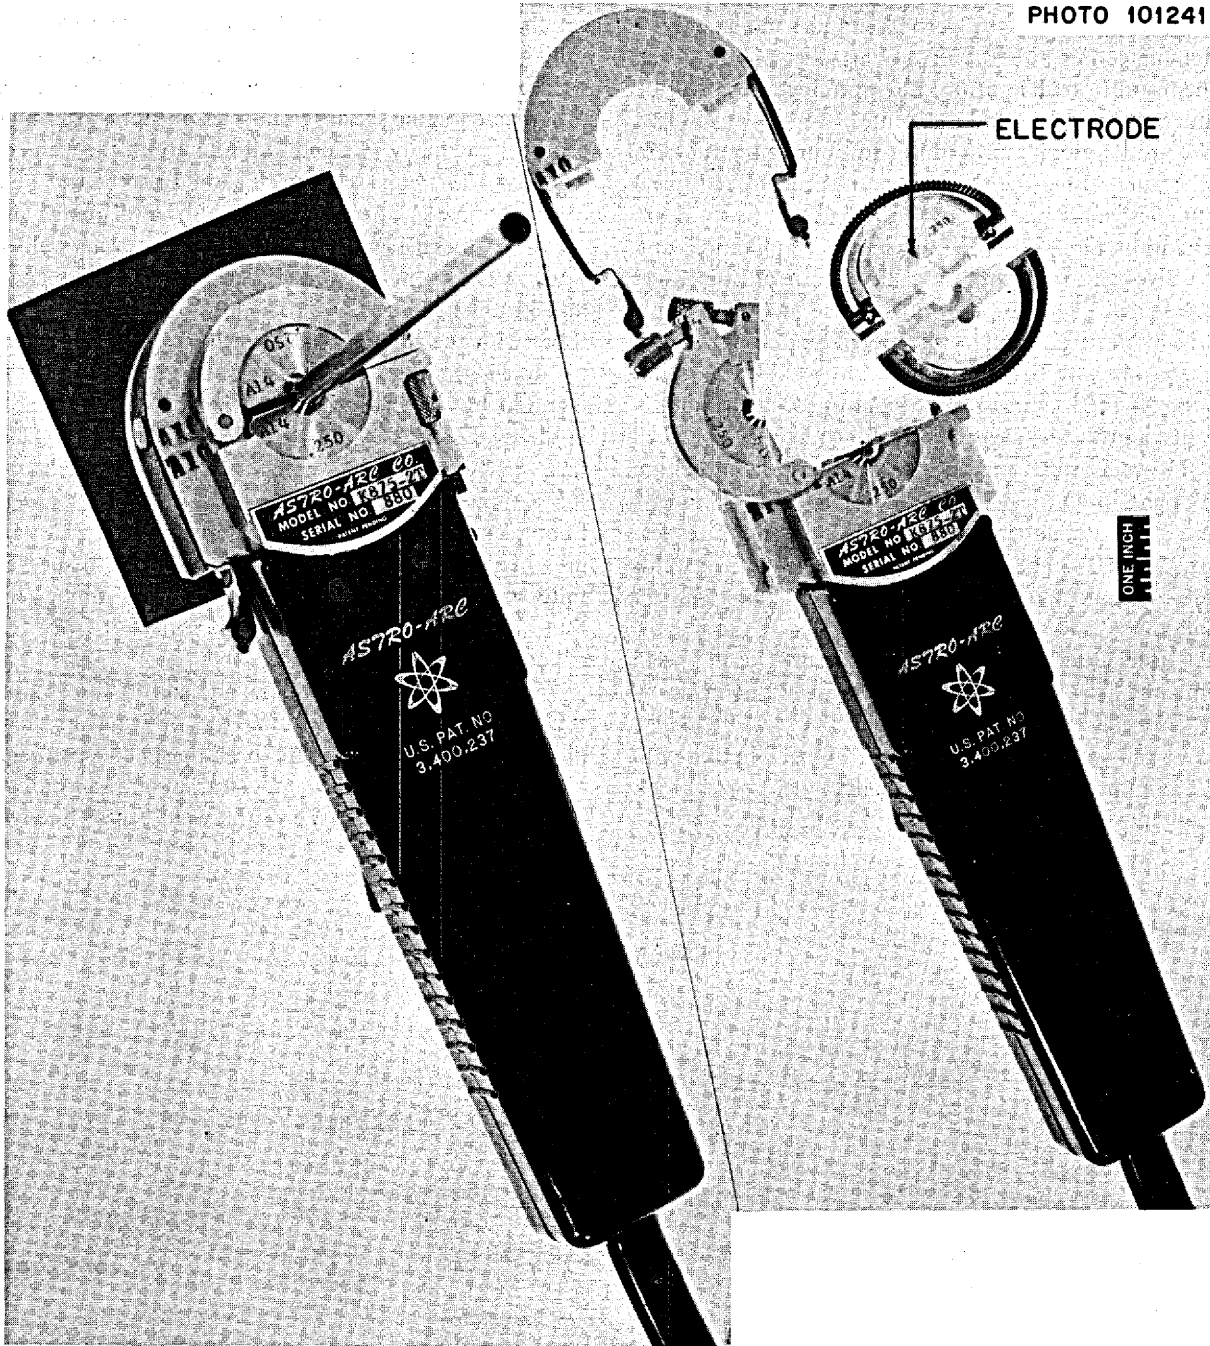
Commercial Orbiting Arc Tube-Welding Head.
